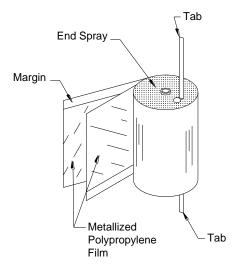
B – Metallized polypropylene film capacitor section with tabs and a spot welded interrupter for the metal capacitor assembly.
